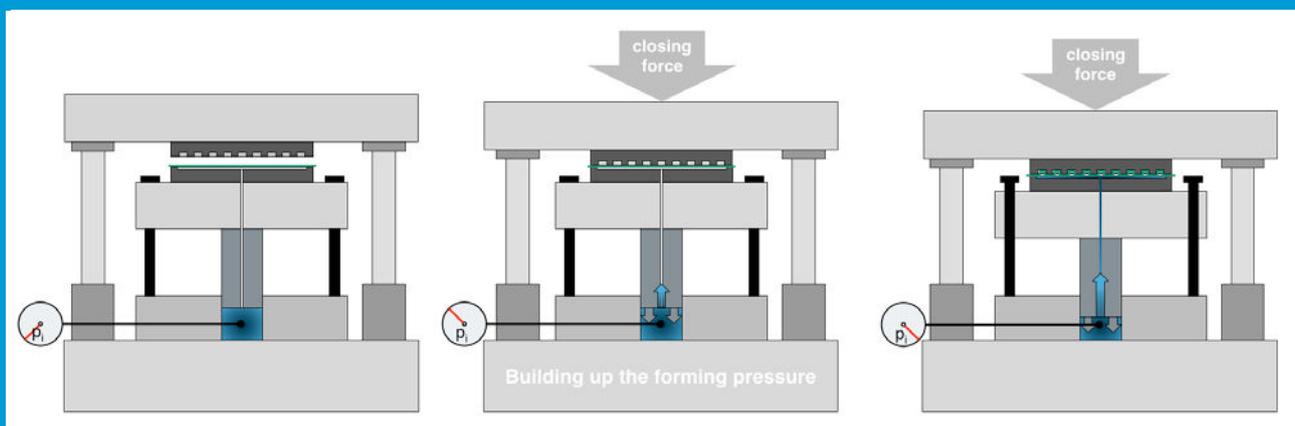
Starting position with the loaded sheet (left); forming begins: the tool closes, simultaneously creating the forming pressure (center); tool completely closed, finished part has been formed (right) [Source: Fraunhofer IWU]
